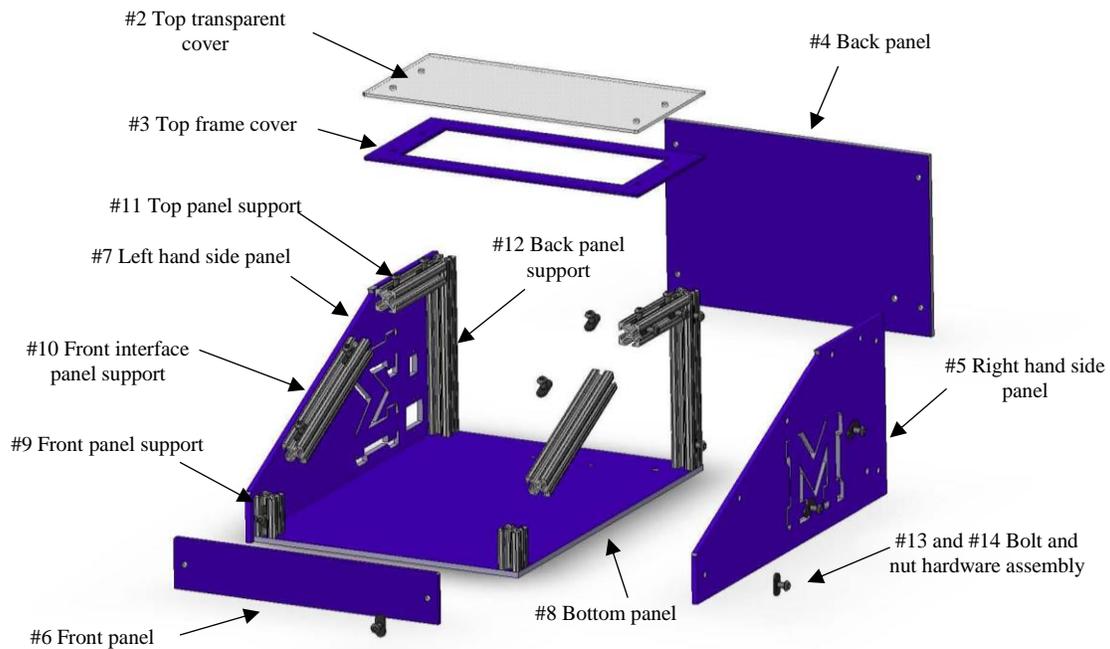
Enclosure exploded view. Front interface panel, DAQ system, and connectors are not shown.
